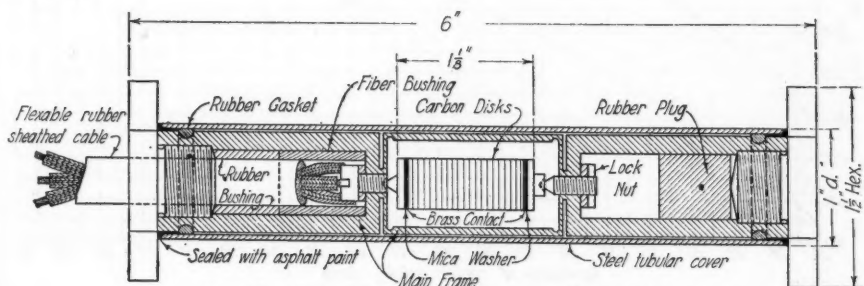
CROSS-SECTION OF ELECTRIC TELEMETER.
